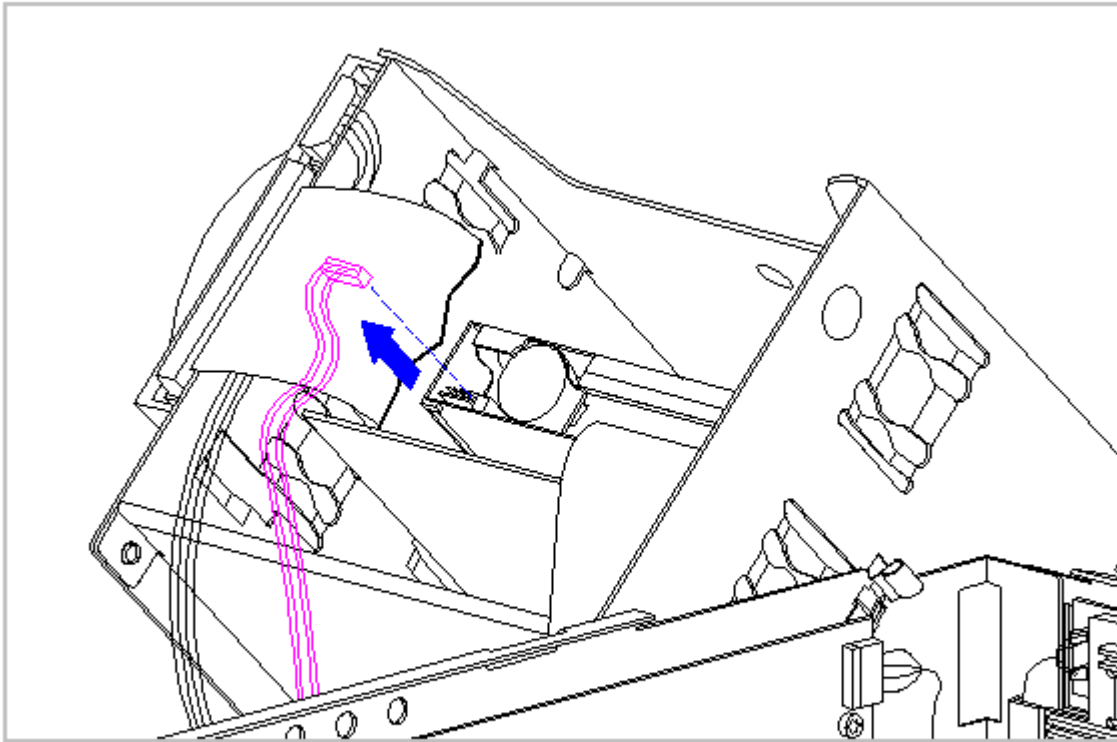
Disconnecting the Power Supply Cable from the Diskette Drive
